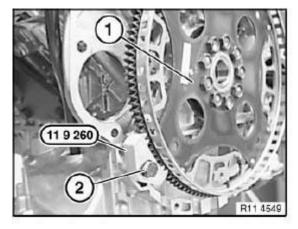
Identifying Flywheel And Transmission Bolt Courtesy of BMW OF NORTH AMERICA, INC.
